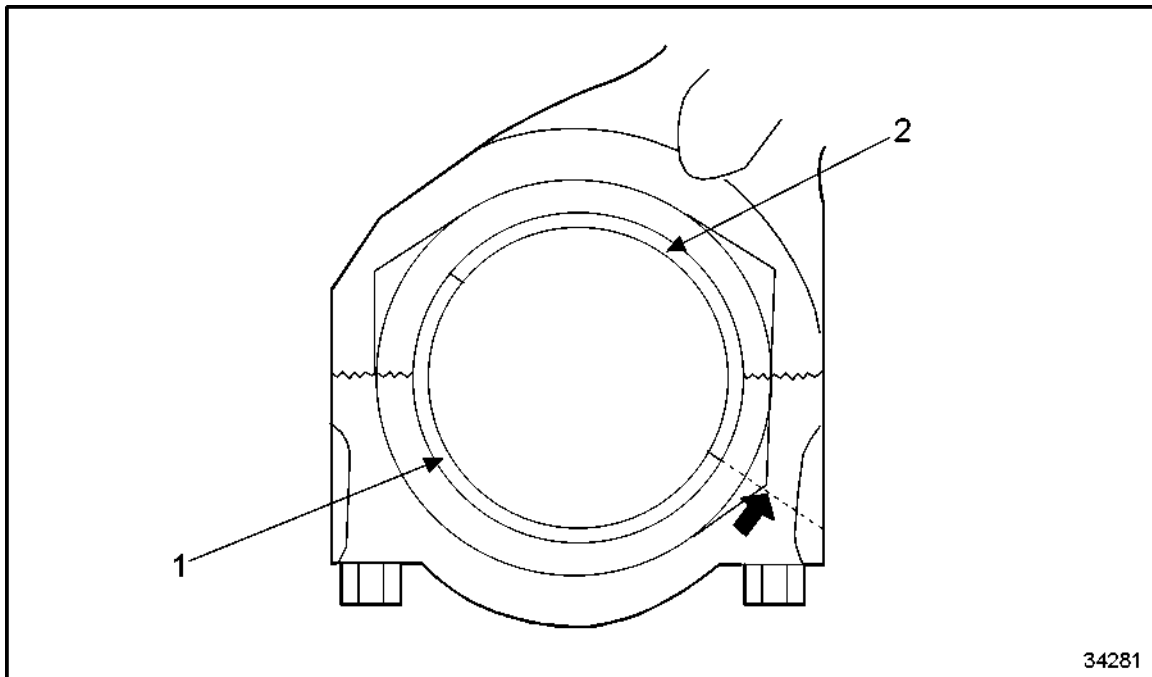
Marking Connecting Rod Bearing Shells According to Cylinder Number on Front Surface
